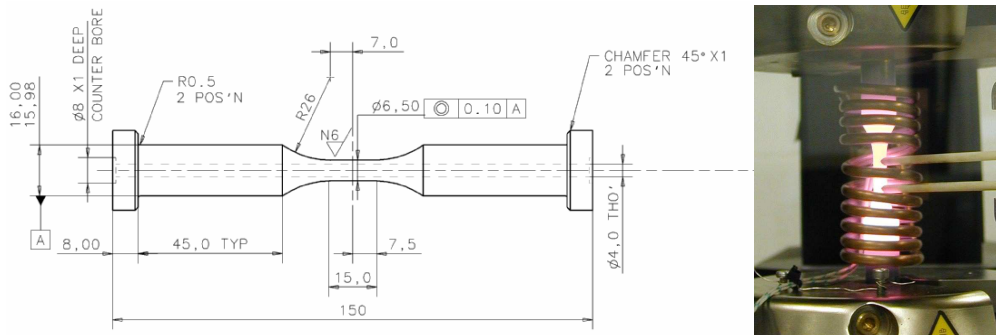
Geometry of thermo-mechanical fatigue test specimen and induction coil with extensometer.
